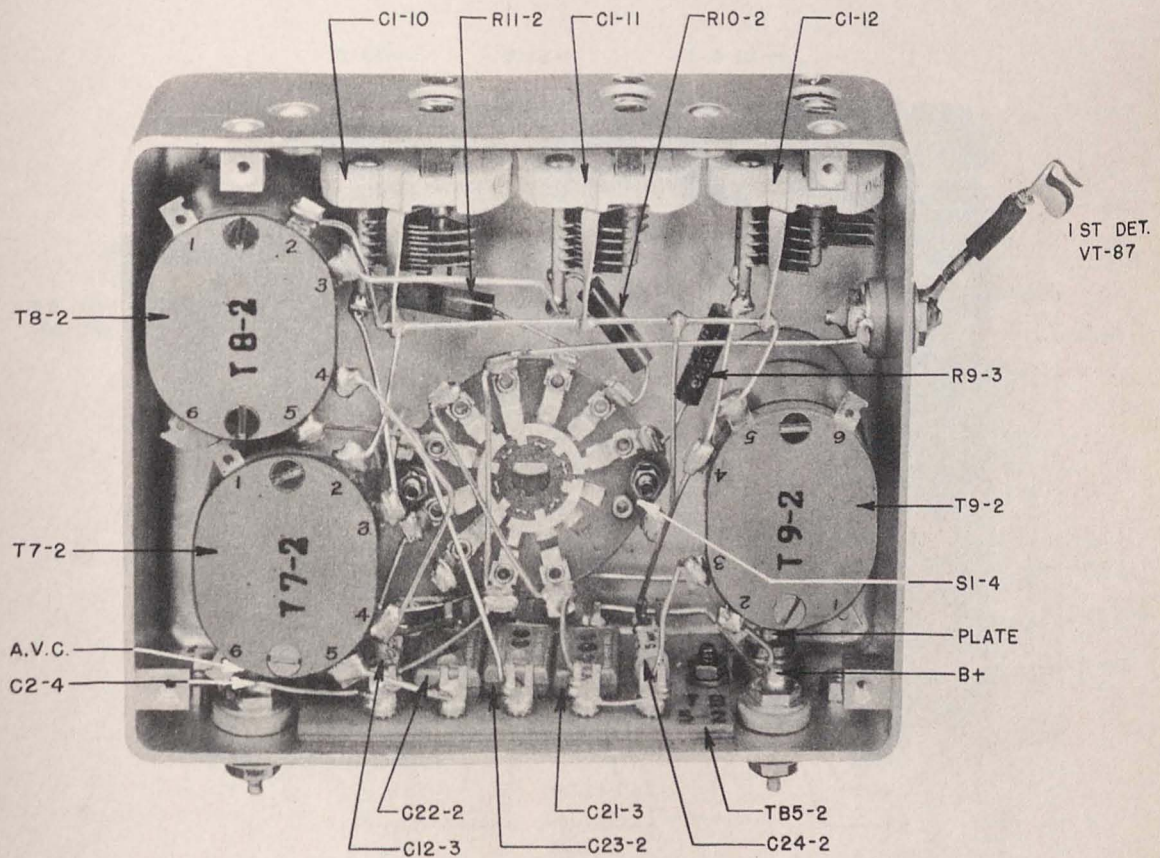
2ND R.F. TUNING ASSEMBLY (106)
